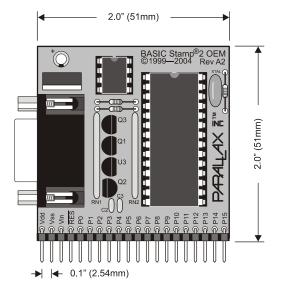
BASIC Stamp 2 OEM (Rev. A2) (Stock# 27290 assembled, or #27291 in kit form).
